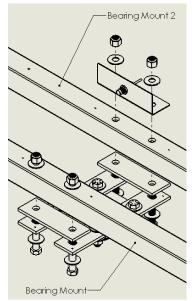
Top of Shaft Bearing Assembly attachment to frame
